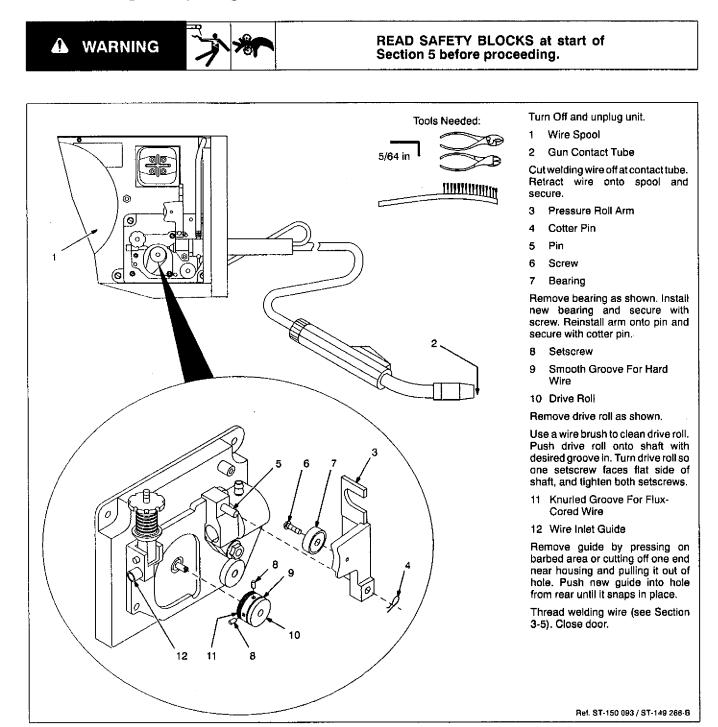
Removing Drive Roll, Drive Bearing, And Wire Inlet Guide
